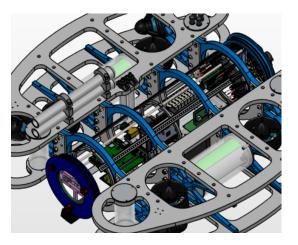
Close-up of DZ<sup>2</sup>'s electrical housing.
